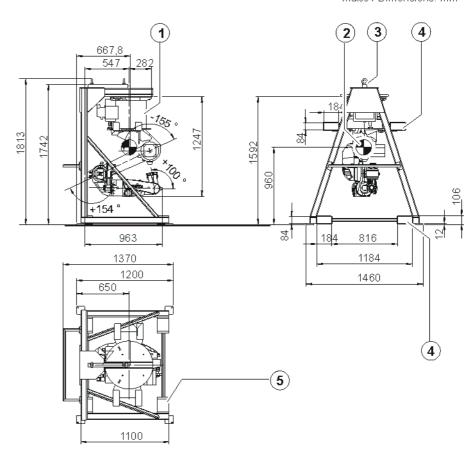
Transport dimensions, ceiling-mounted robot KR 16 arc HW
